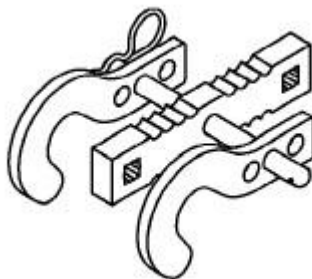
COMPRESSOR, VALVE SPRING - 8215A
